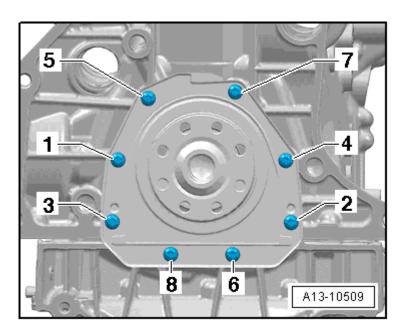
Identifying Sealing Flange Tightening Sequence Courtesy of AUDI OF AMERICA, LLC
